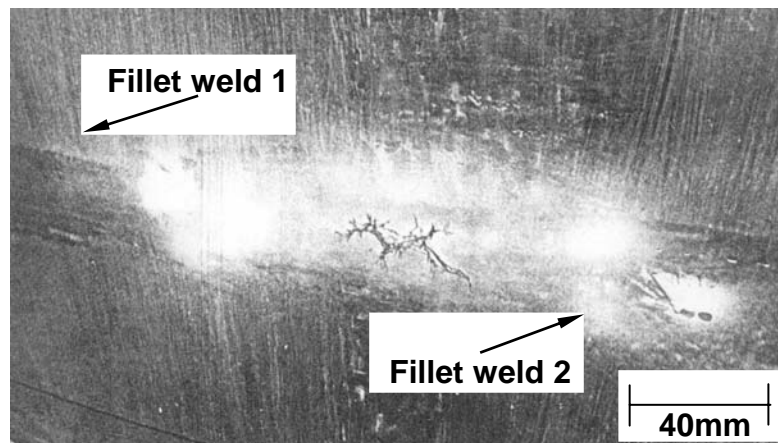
Close-up view of the outer surface of leaked shell' zone, after removing rain water' collector and its fixation collar showing branched type cracks confined between fillet welds of collar with shell.
